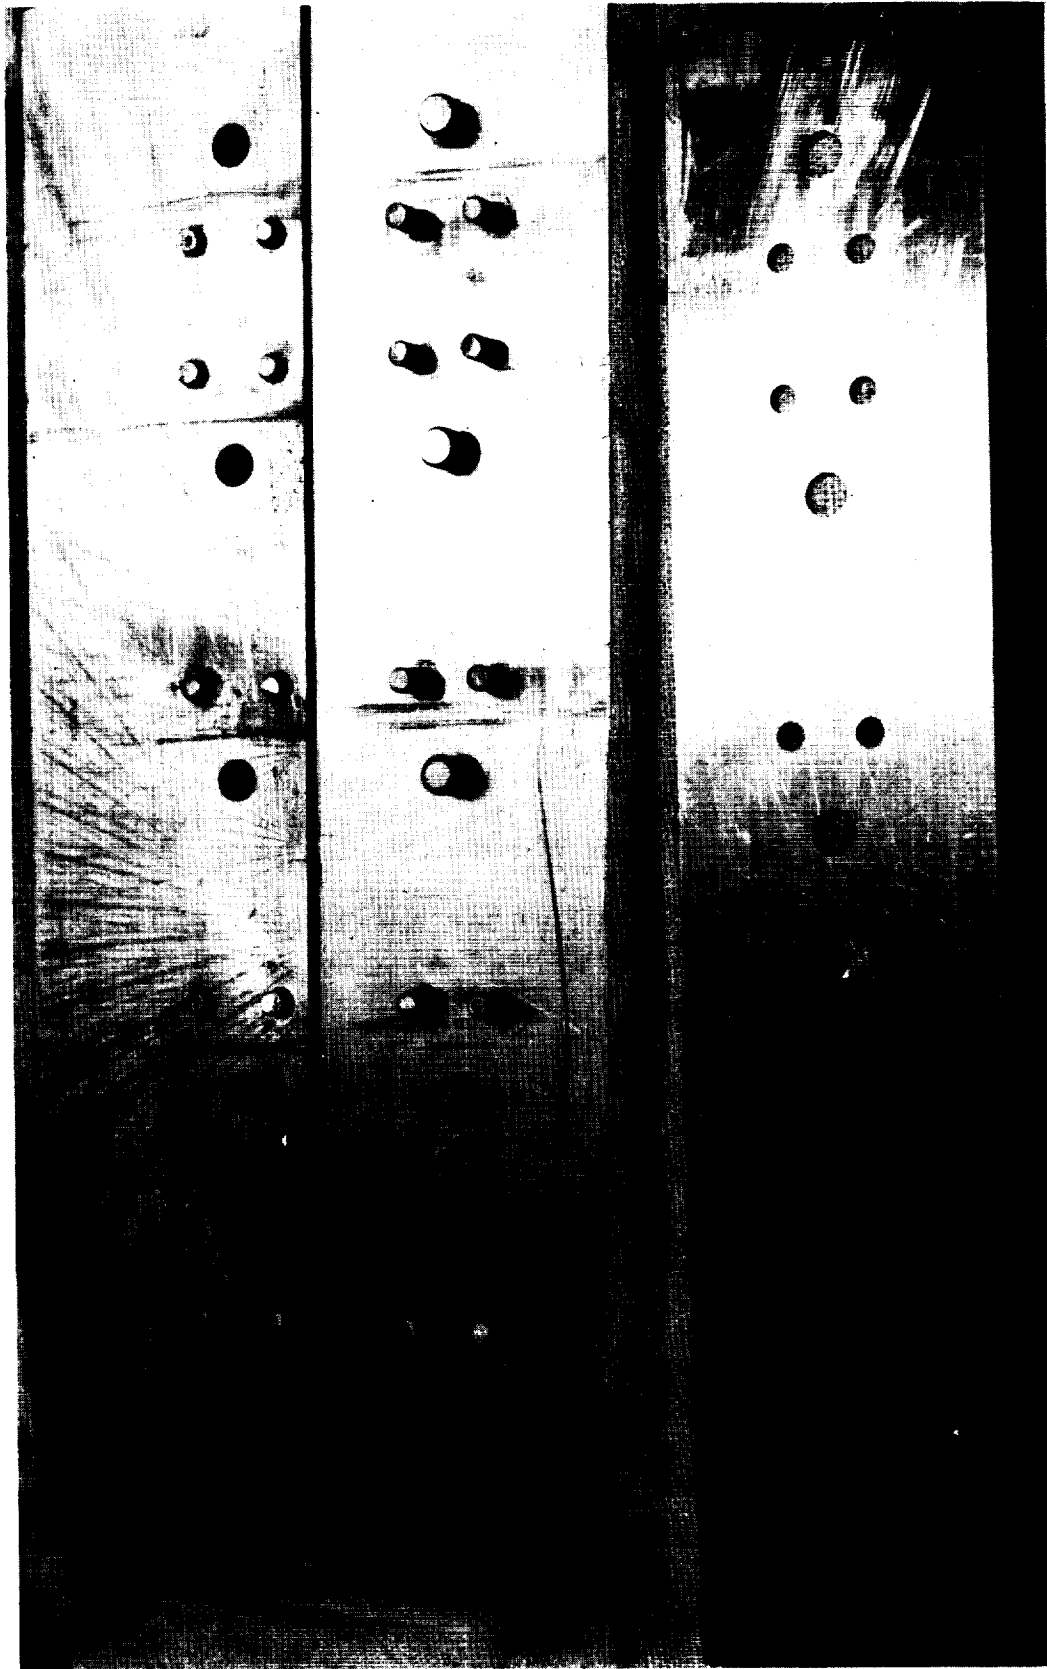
ASSEMBLY FIXTURE AND ONE SHIM.
